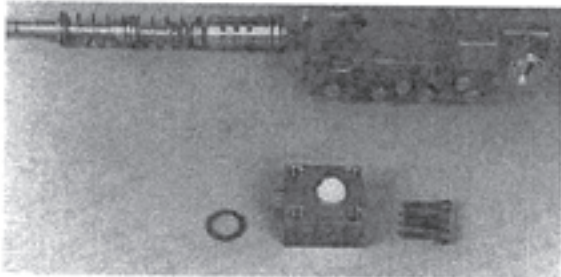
Torque HZ Control Valve Housing Screws
